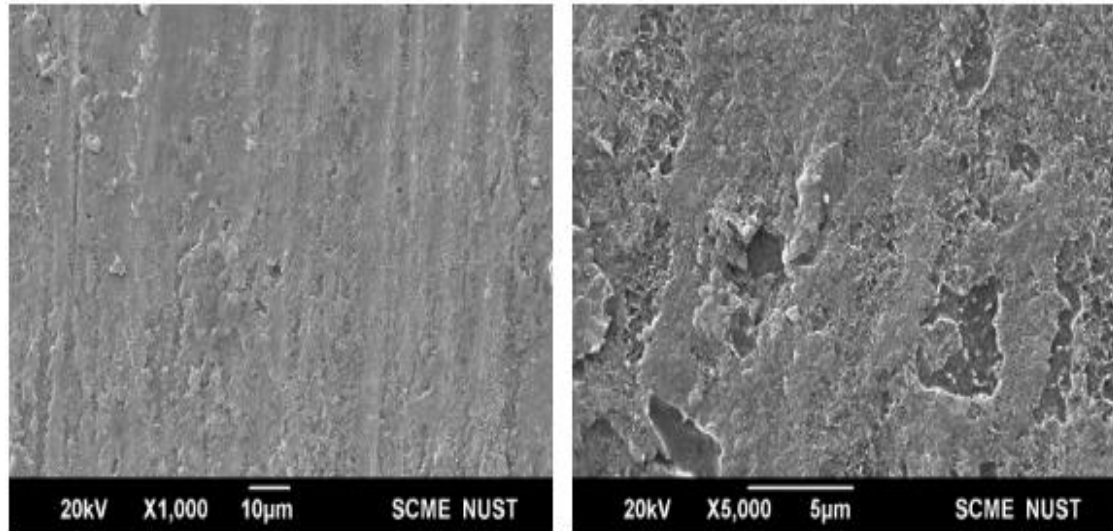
1 Fracture surface of aged As Received sample
